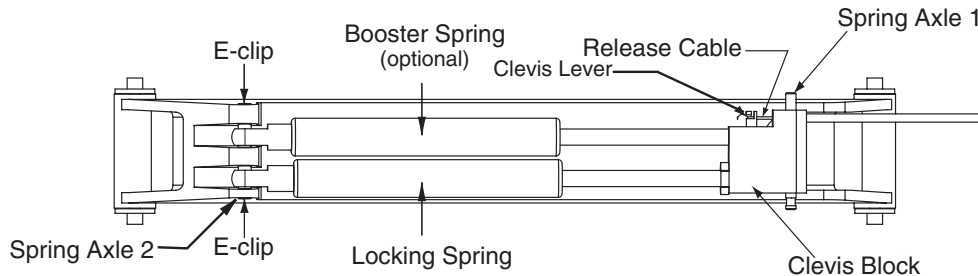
Inside View of Vertica Arm with Top Cover Removed
